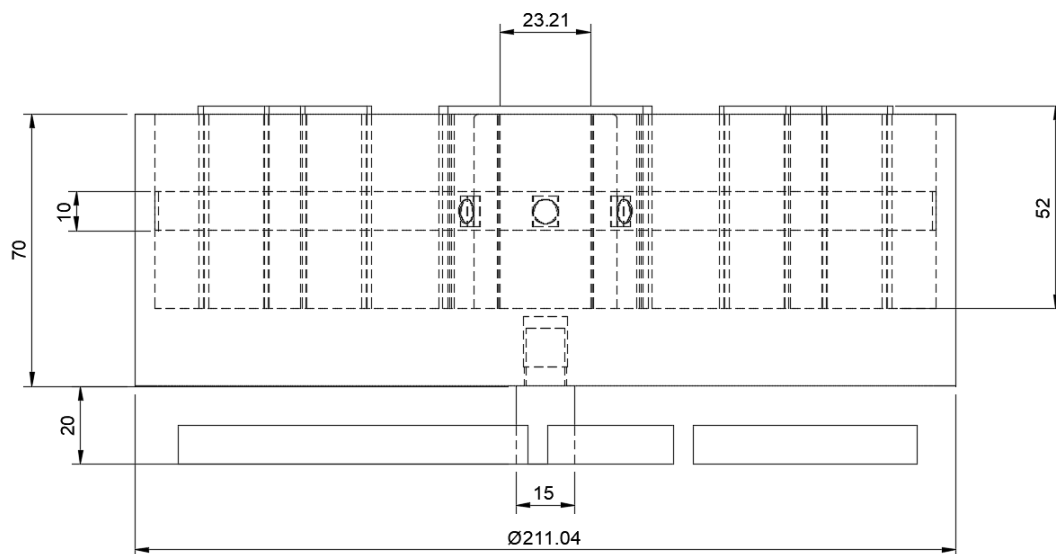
Side view of 2D technical design of CAMINO with dimensions
